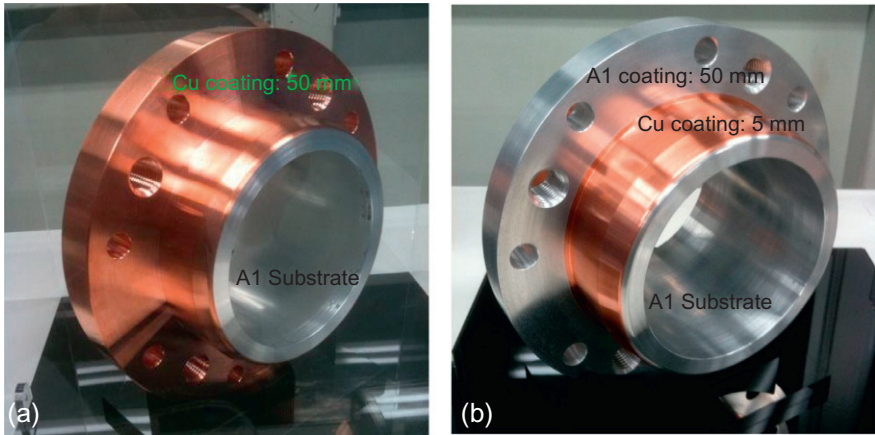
Thick coatings deposited by cold spray. (a) Thick Cu coating. (b) Thick Al coating.
